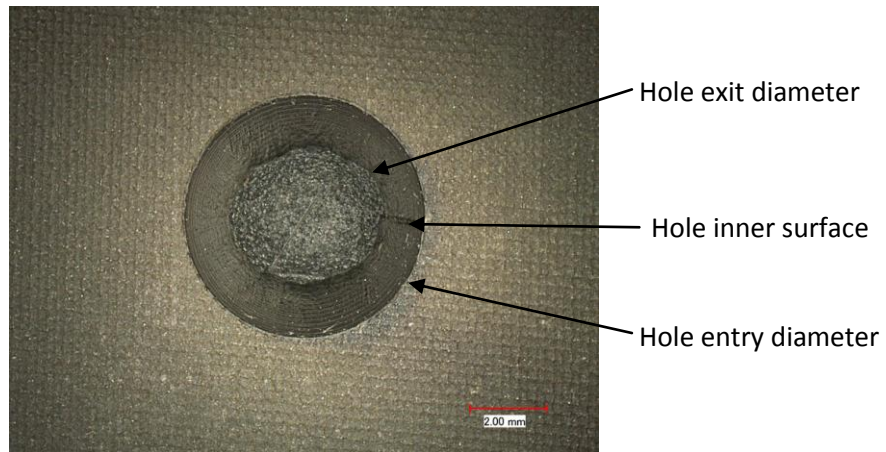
Hole of 6 mm diameter drilled in 6 mm thick CFRP composites.
